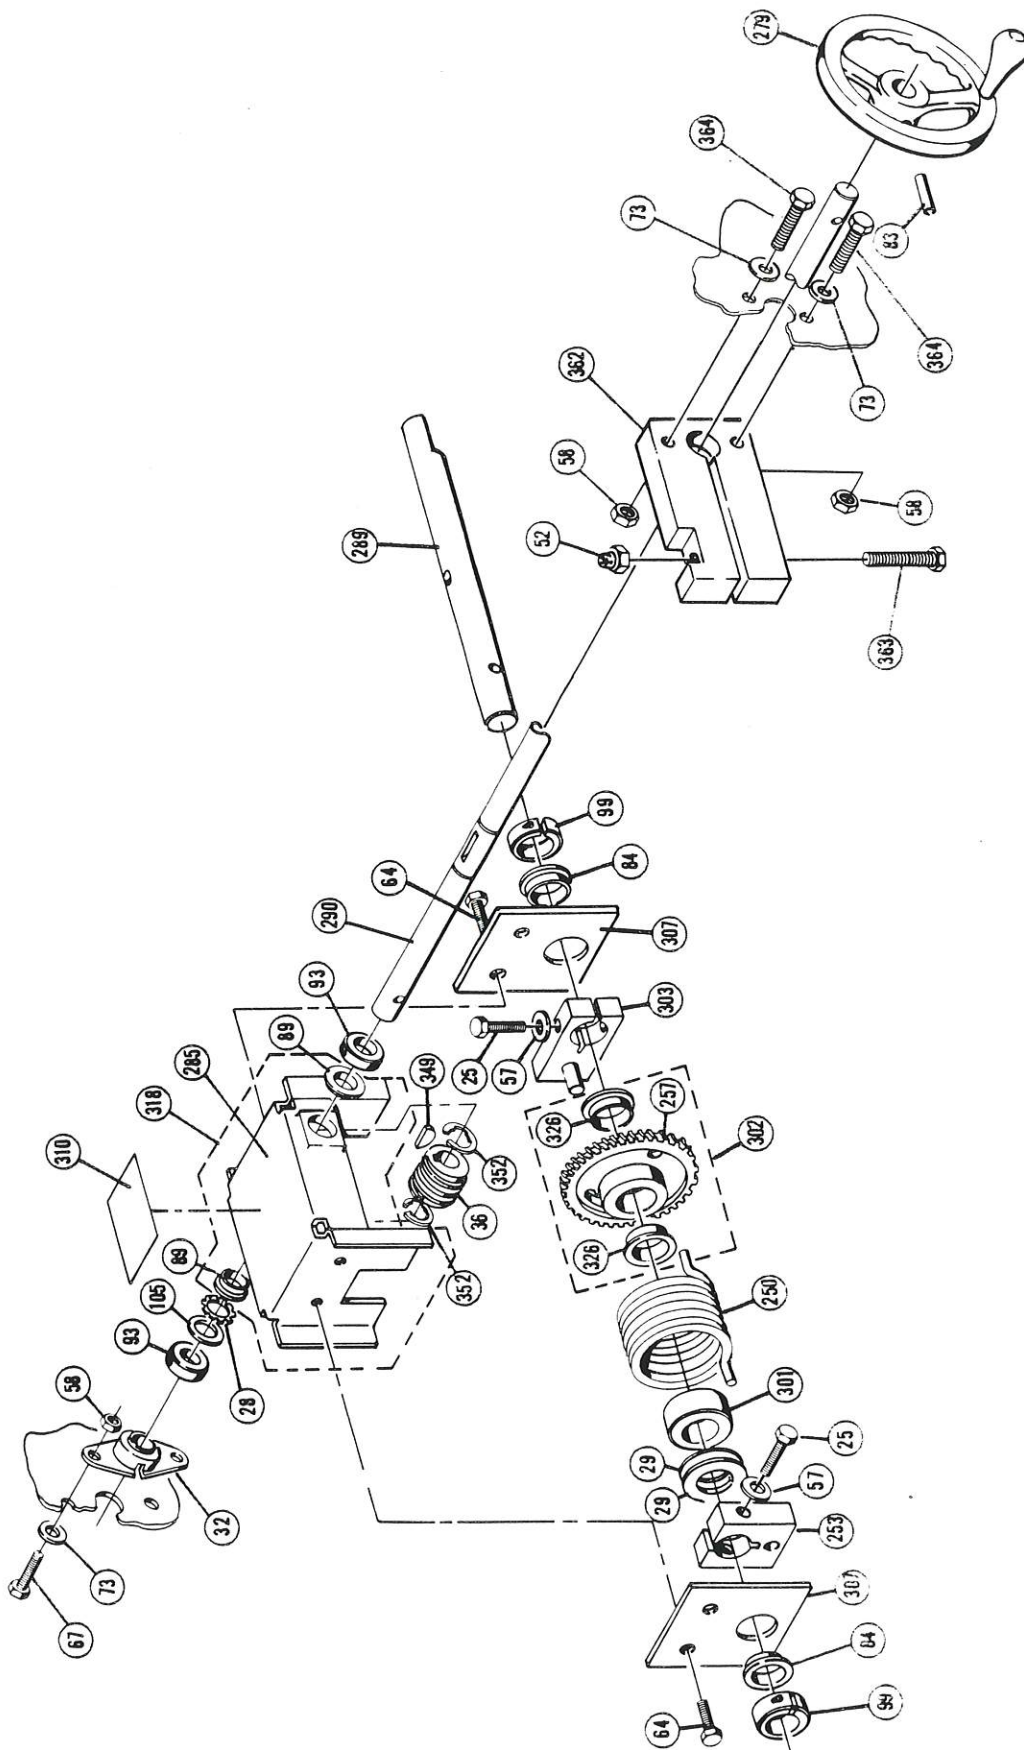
BOX WIDTH DRIVE ASSEMBLY
